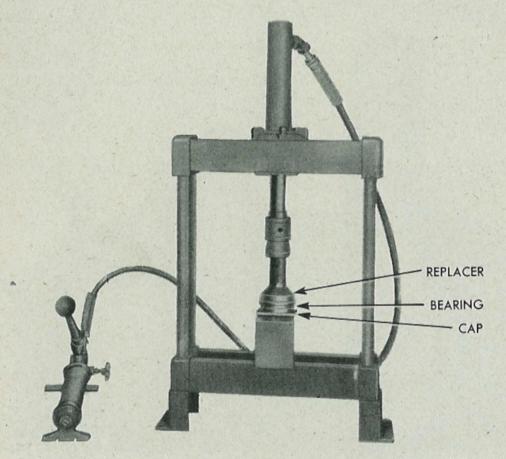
Driving Countershaft Front Bearing into Case with Bearing Replacer 41-R-2397-72
